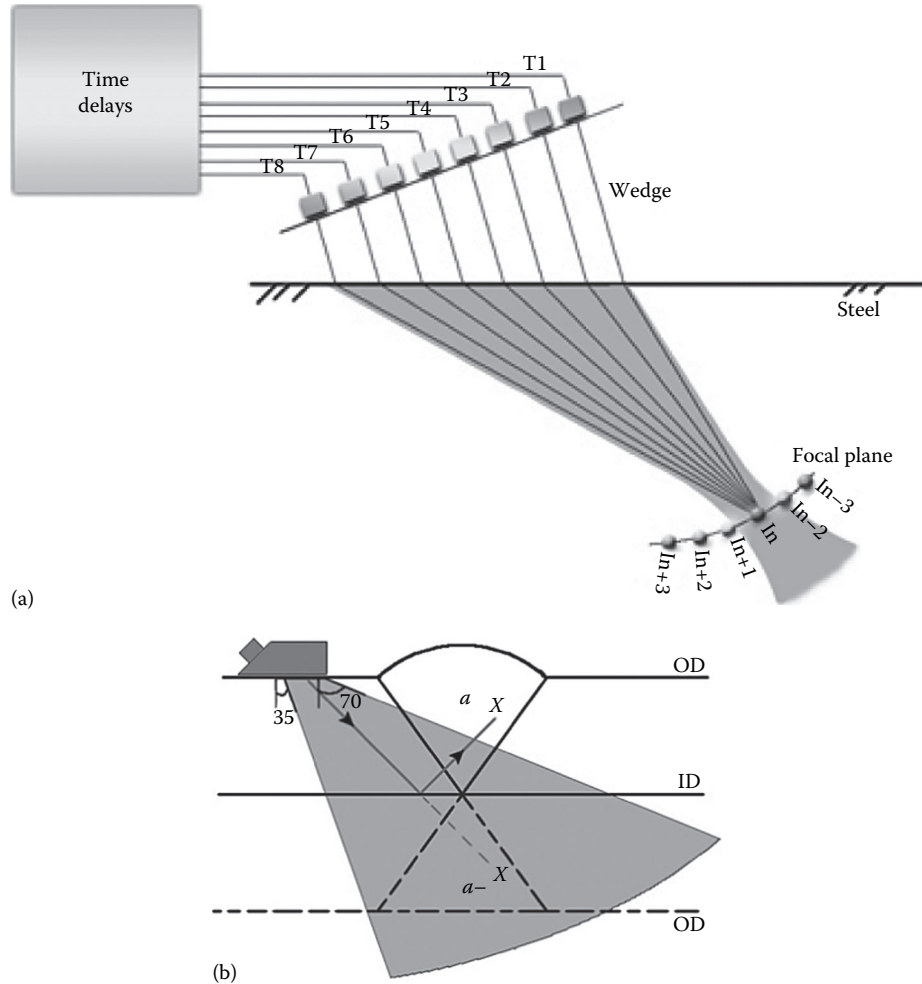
Phased array technique. (a) Principle and (b) technique for welds.
